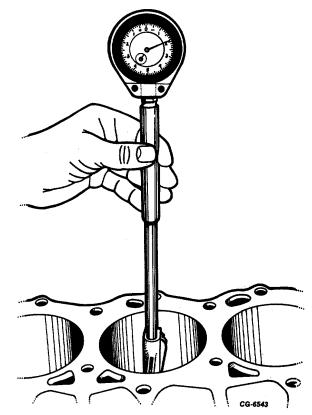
Checking Cylinder Bore with Dial Bore Gauge SE-2331
